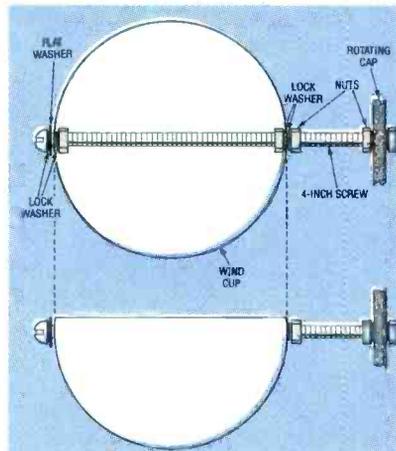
ATTACHING THE WIND CUPS. The wind cups secure to the rotating cap with 4-inch long machine screws.
